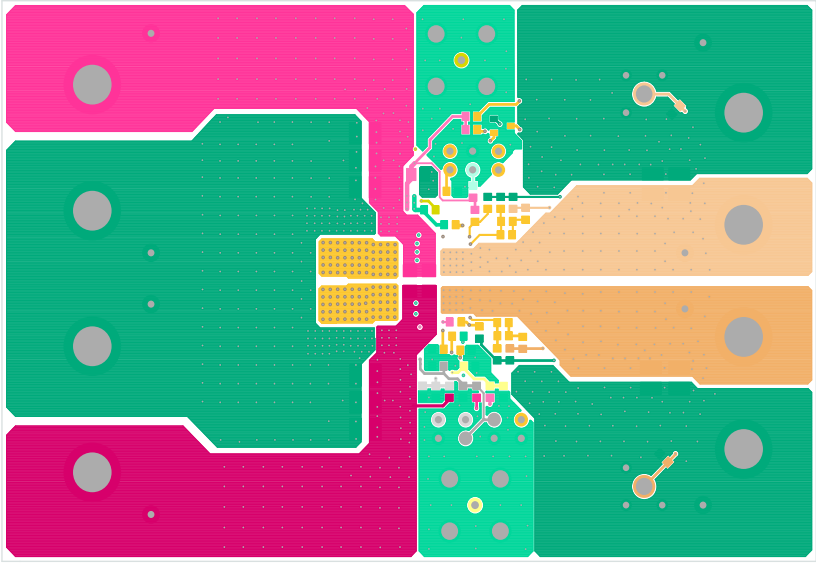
BOTTOM LAYER SOLDER SIDE
